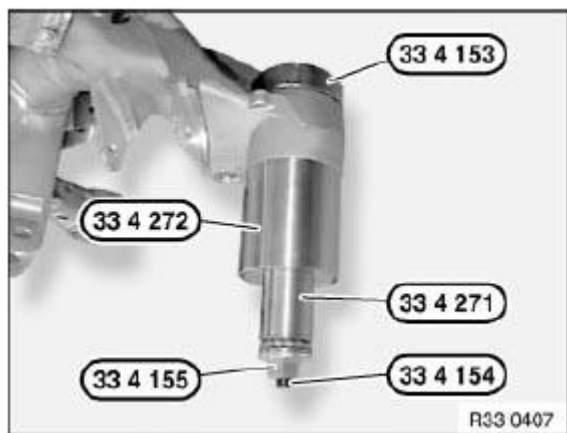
Identifying Special Tools (33 4 154, 33 4 155, 33 4 271 And 33 4 272)
